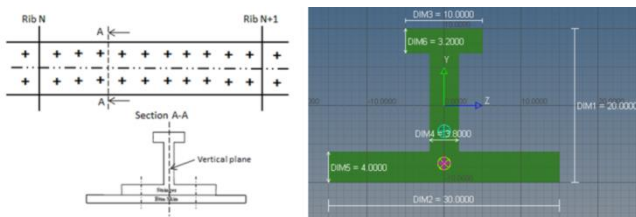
Typical Skin-Stringer Attachment and Stringer Geometry
